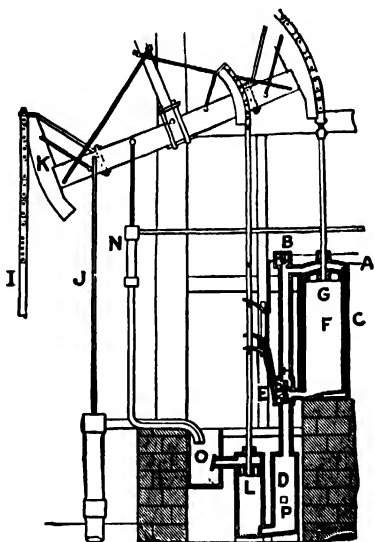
James Watt's double-acting steam engine. (Courtesy of John M. Wiley Company.)
